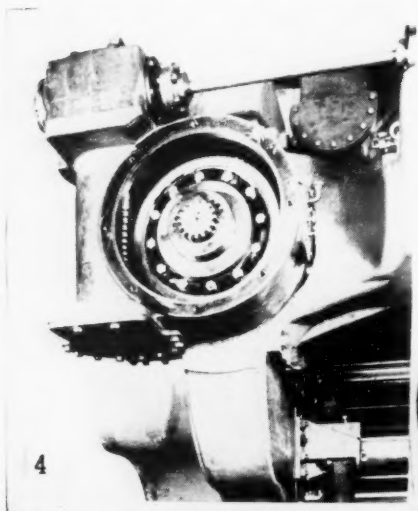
Precision Gearing Roll Adjustment Mechanism for New Calenders
